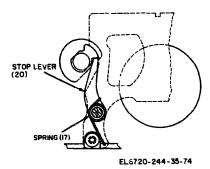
Spring location (spring (17) from fig. 3-11).
